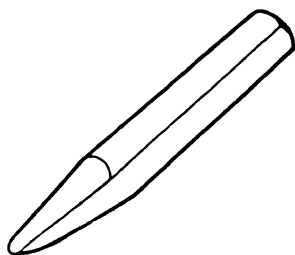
Round-pointed or "drawing" chisel for use when drilling.
